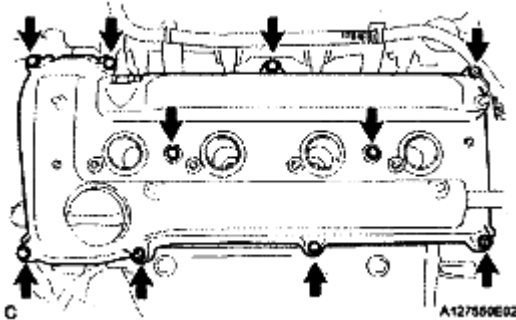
Locating Cylinder Head Cover Bolts And Nut
